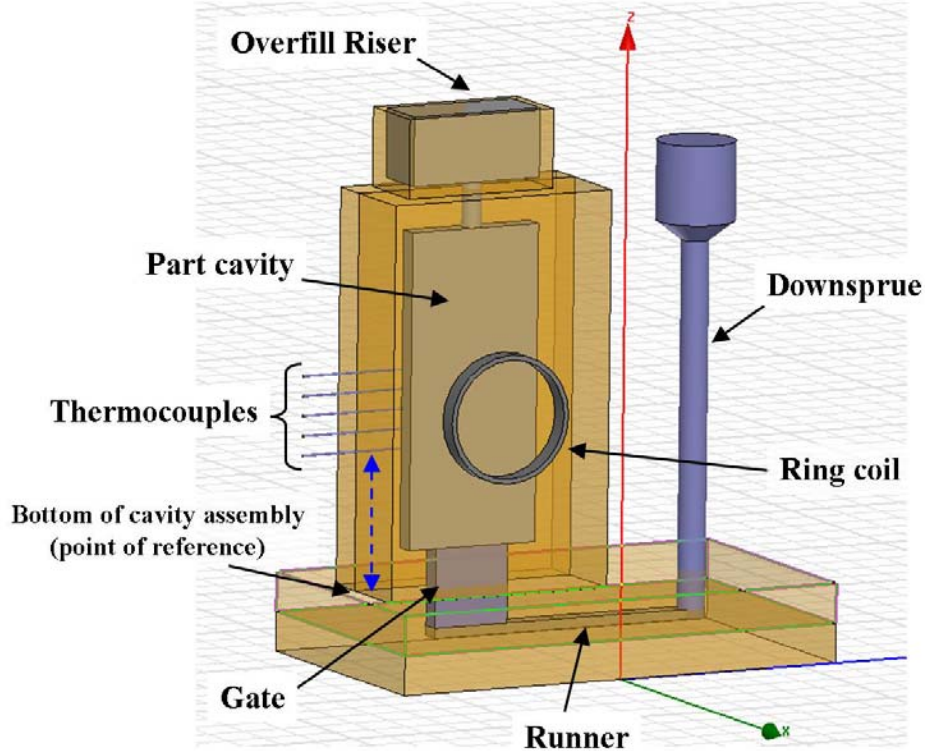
Drawing of the half-grate mold used in the 30 mold experiment
